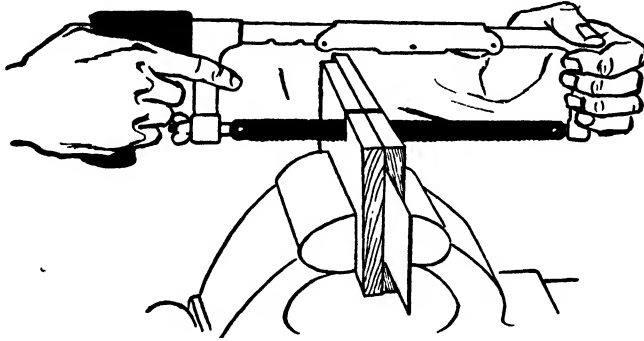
A small piece of thin metal may be sawed easily by clamping it between pieces of wood in a vise and sawing through both wood and metal.
